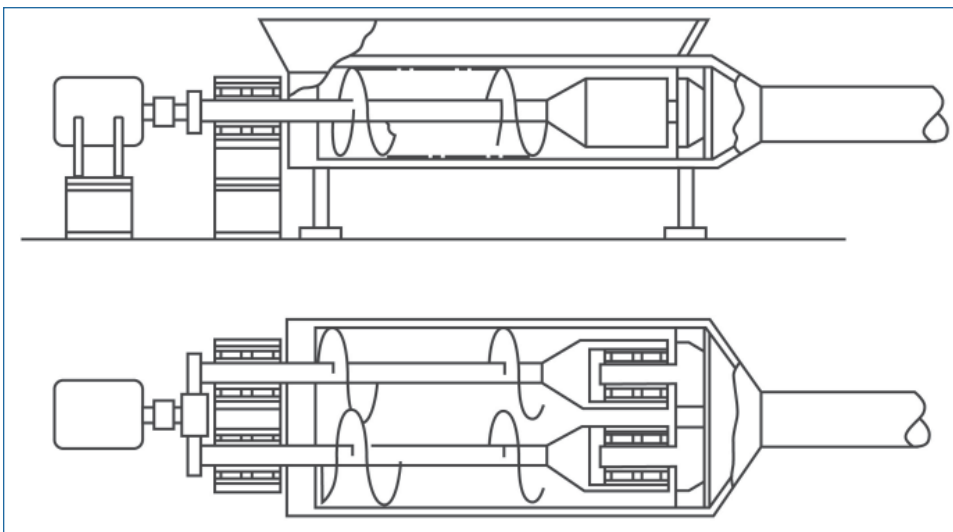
Schematic of a screw feed device used on either a piston or PC-type cake pump. A motor, speed reducer, timing gears, four sets of bearings, and at least two sets of stuffing boxes are required. The device is really one pump designed to feed another pump with higher-pressure capabilities.
